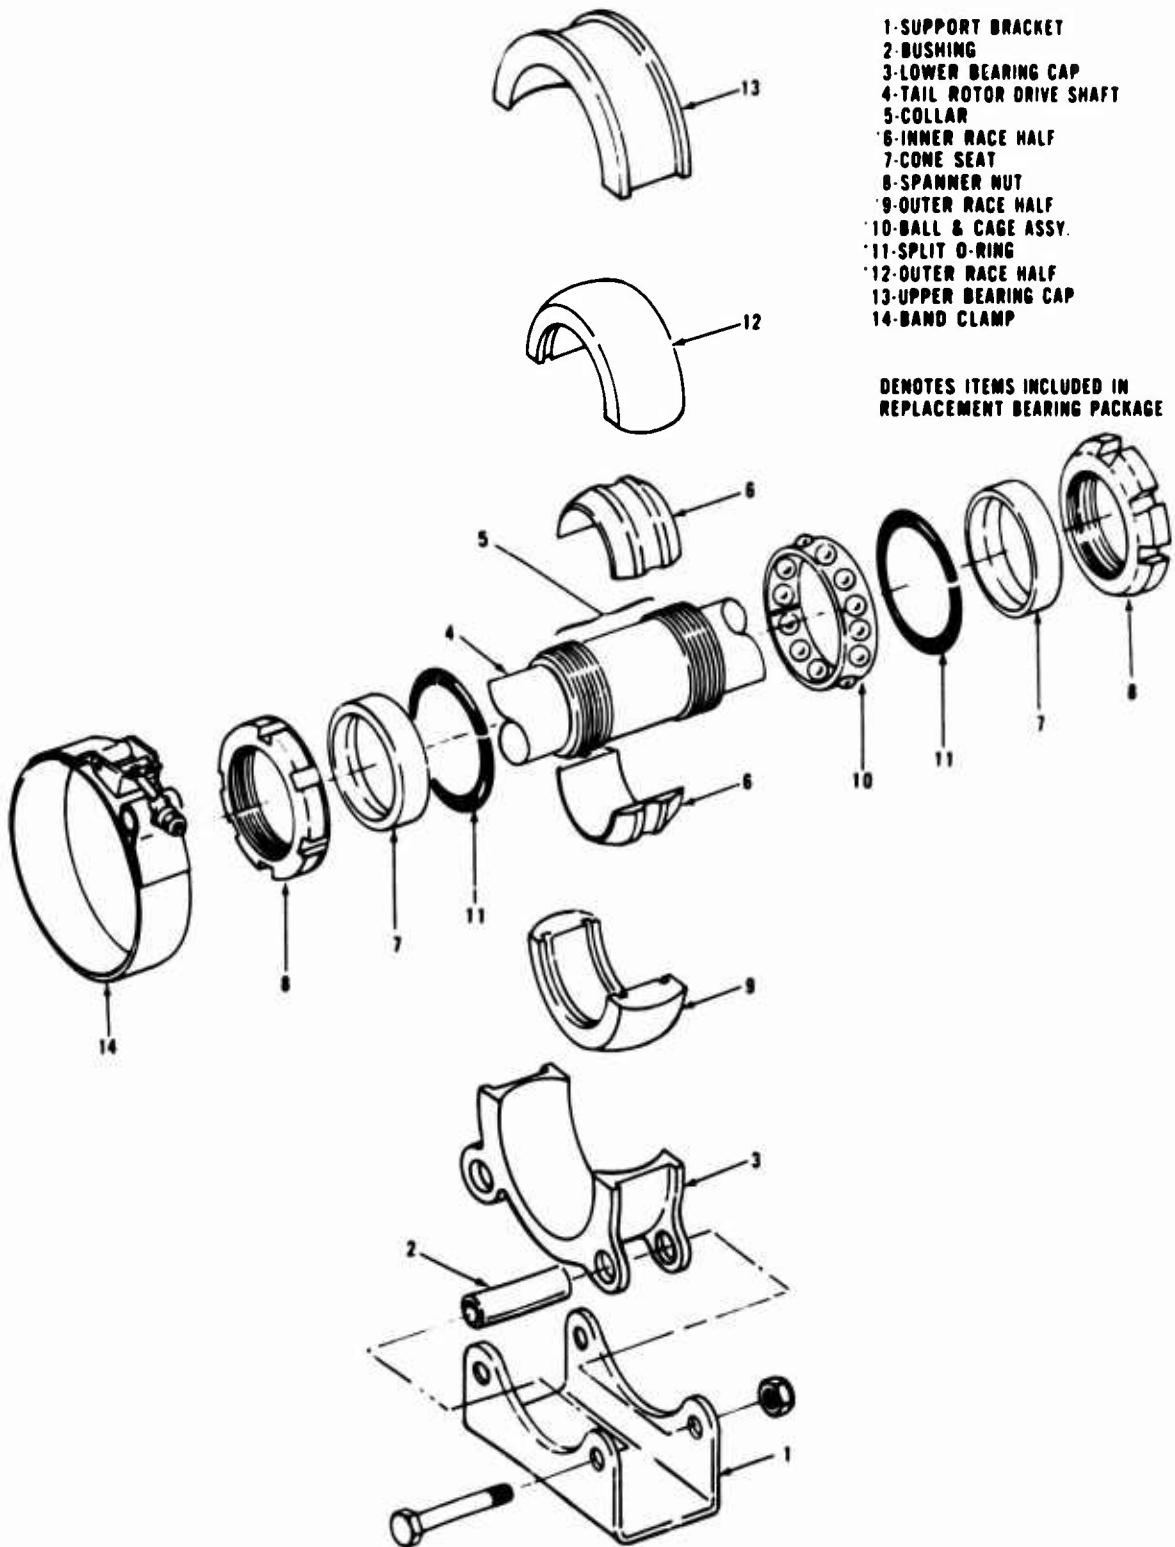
Exploded Isometric View of Selected Candidate, Split Hanger Bearing Design.
